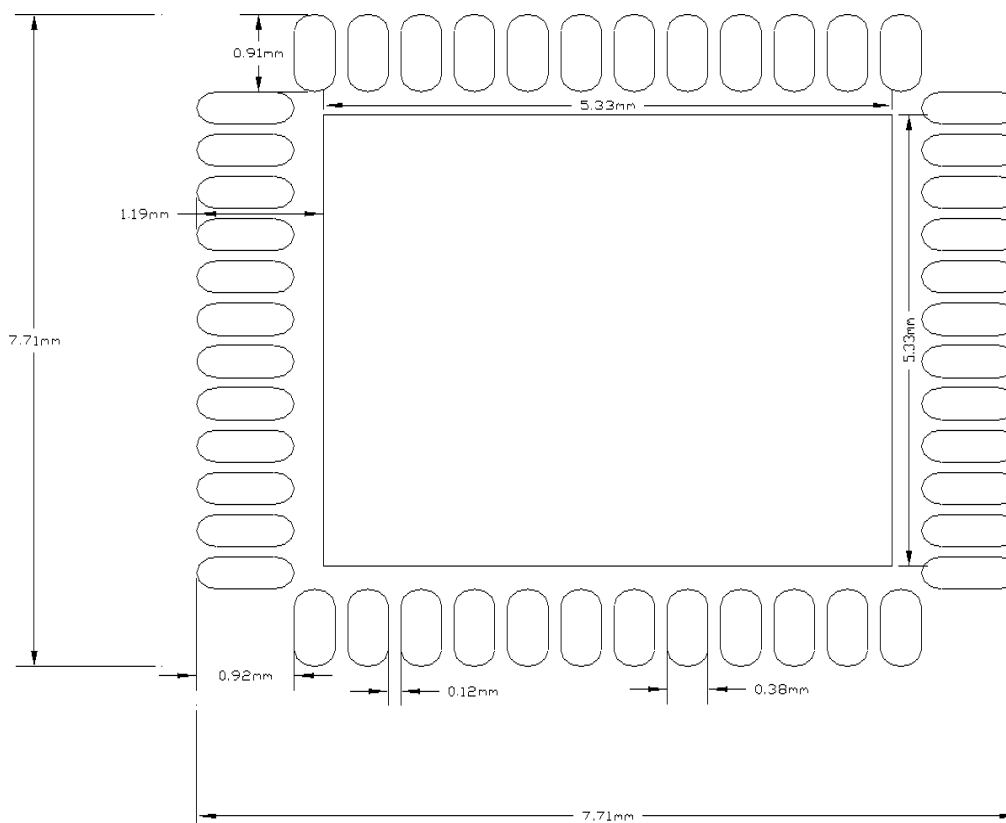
48-Pin LGA Solder Mask Pattern
